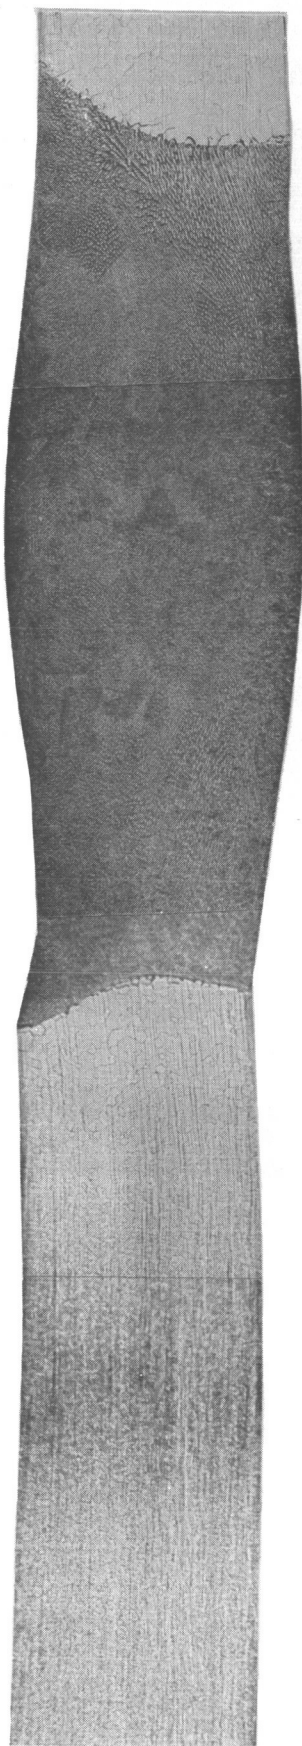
Typical TIG Sheet Butt Weld Schedule for
